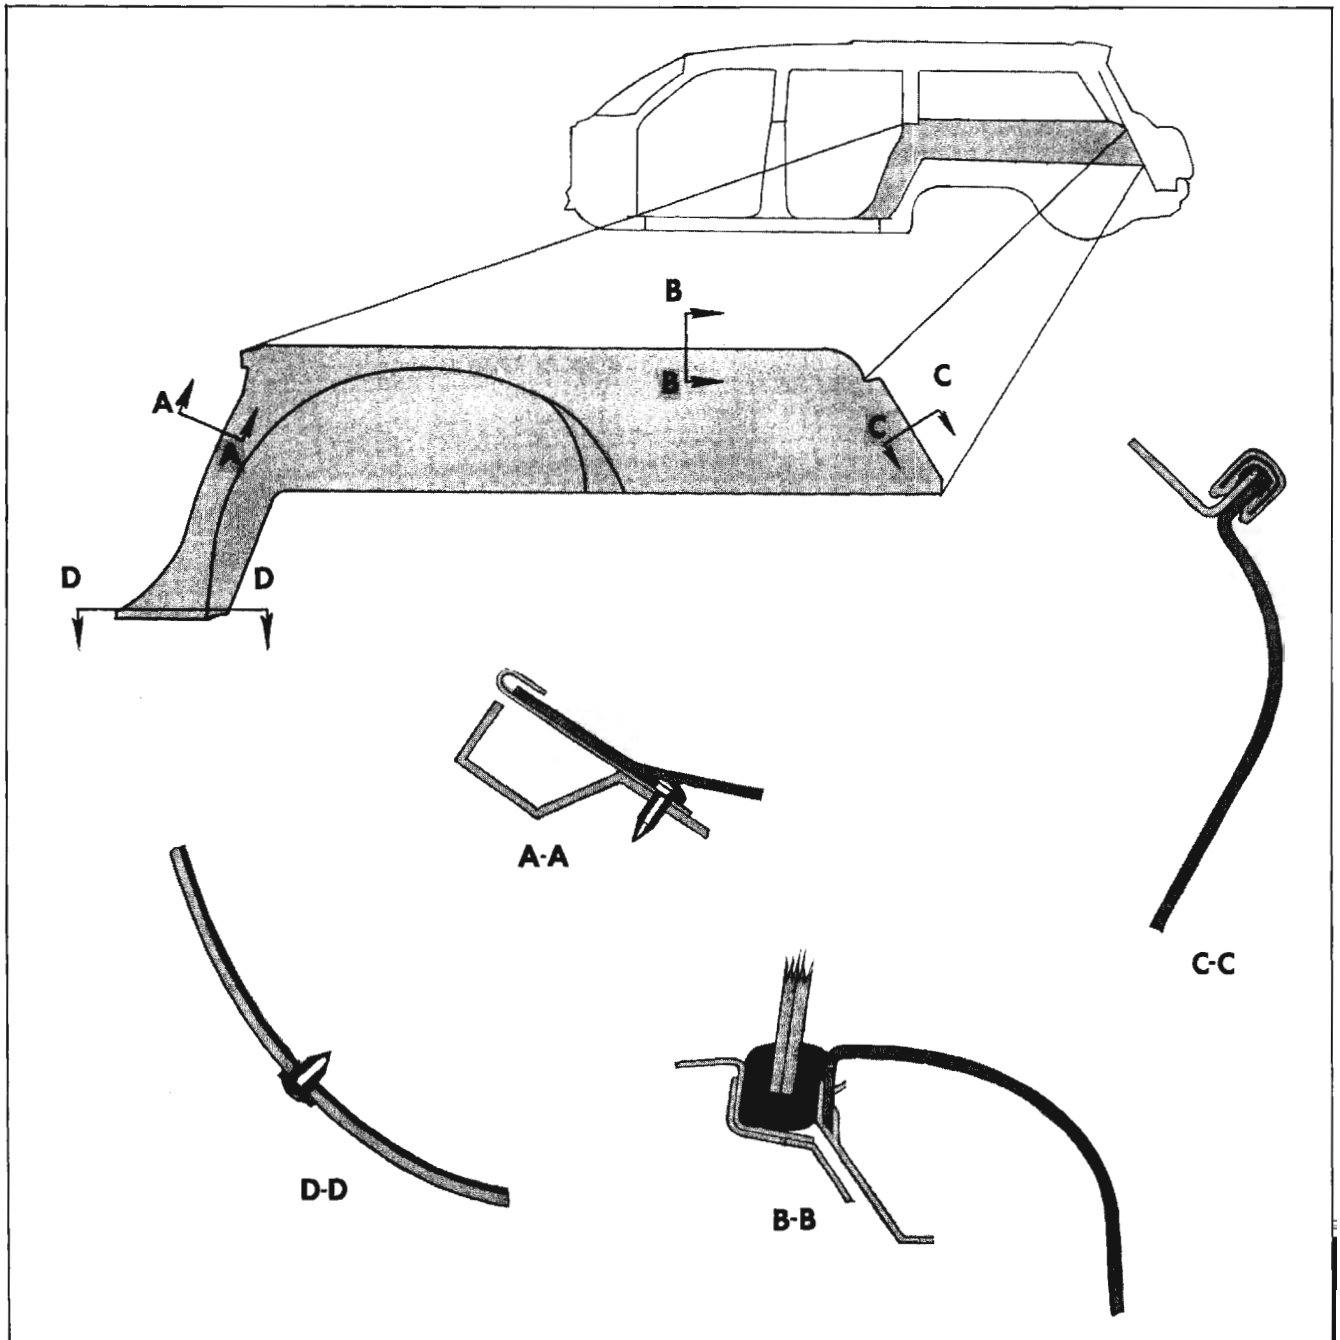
Quarter Trim Panel (Two Seat, Without Luggage Option)
